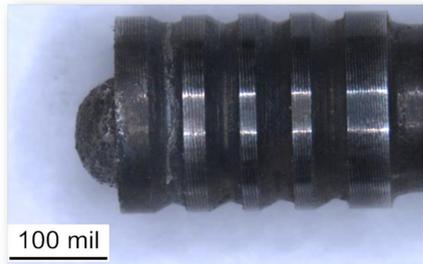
Pin of tool with laser deposited "scribe" Courtesy of Todd Curtis
